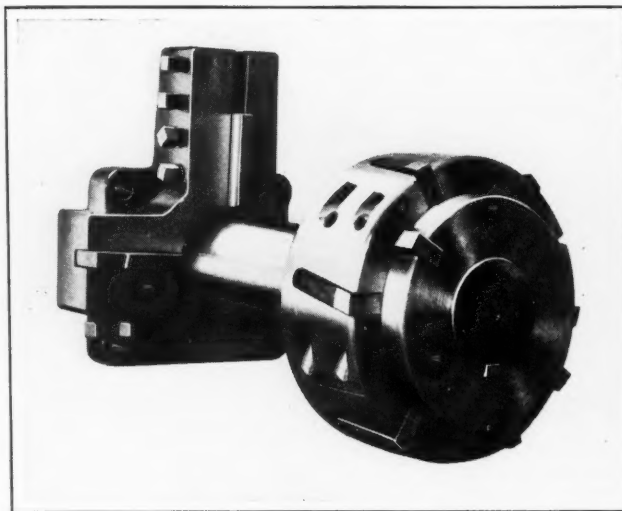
Tool-head used in boring Hole G, Lugs H, and Hole I, and in facing Surface J, Fig. 5
